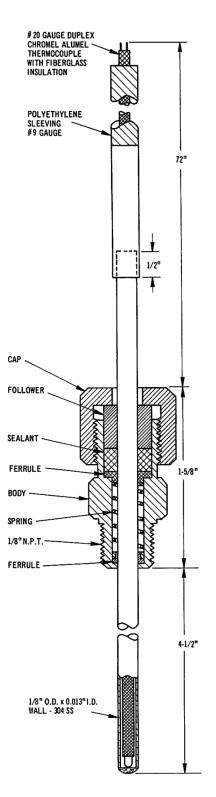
Figure 6.9-2 Pipe Surface Thermocouple Assembly [Vol. II, Chapter 6, p.6.9-5]
